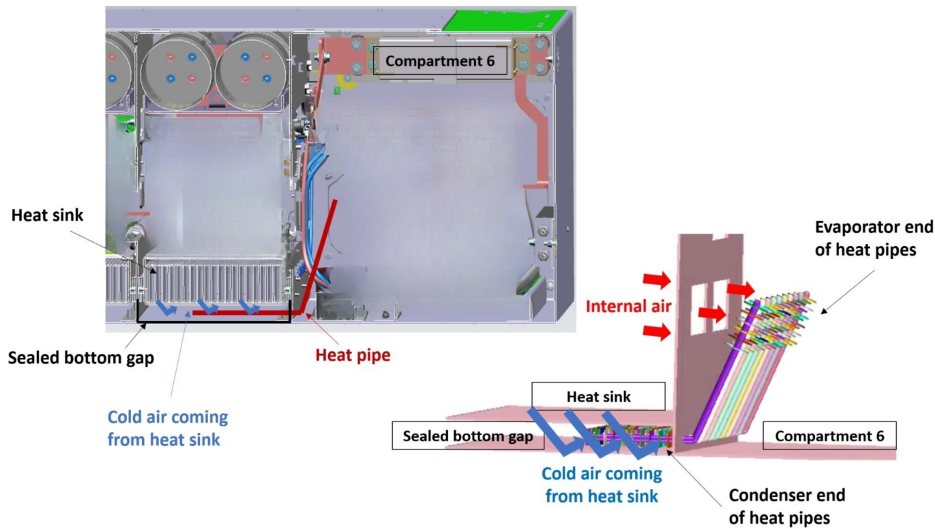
Design D. Heat pipes using the bottom gap as heat dissipator with air extracted from heat sink.
